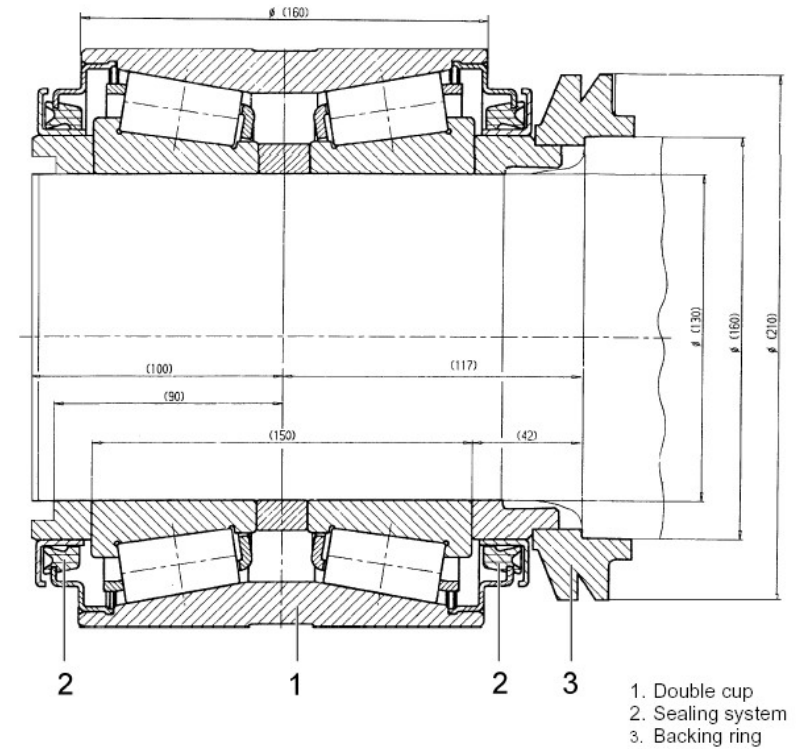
AXLE BEARING LONGITUDINAL SECTION
